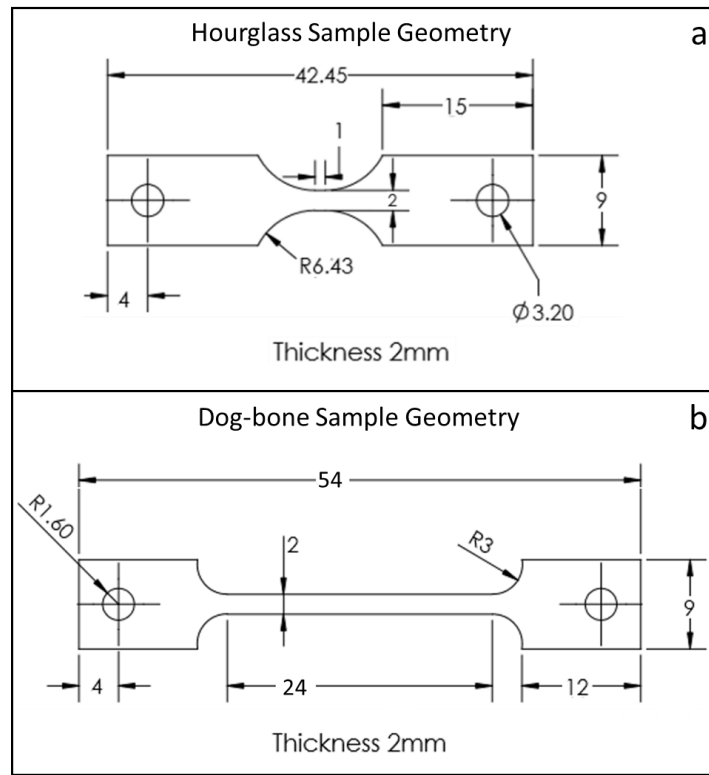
(a) Drawing of the hourglass sample geometry; (b) drawing of the dog-bone sample geometry.
